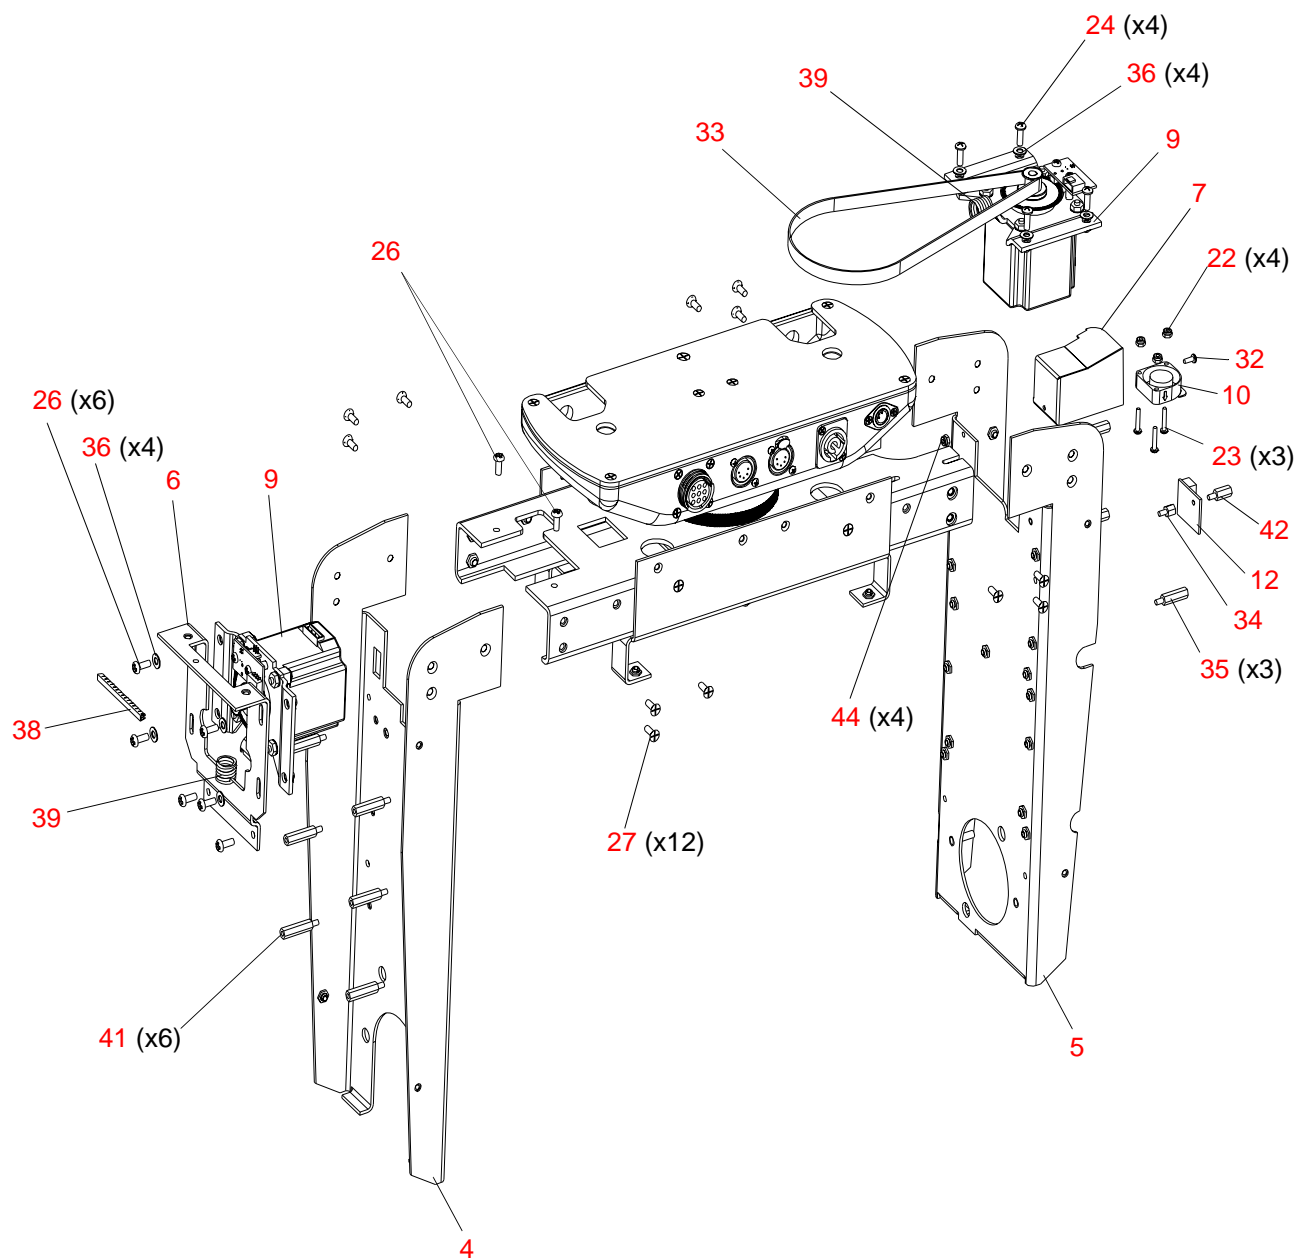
VL500 Yoke Assembly (VL500/VL500D/VL500A)
